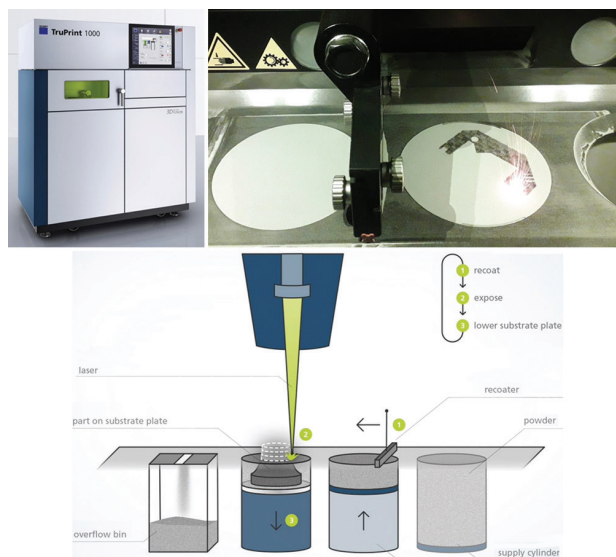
TRUMPF TruPrint 1000 machine, advocated the most productive machine in its class, providing all of the benefits of AM and laser metal fusion for complex, metallic components (top-left); printing in progress of the demonstration tool steel part (top-right); the operating principle of metal 3D printing explained in brief (bottom)
